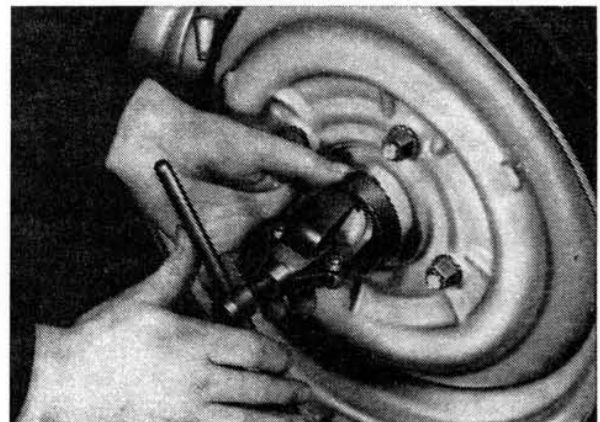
/1 - Removing Hub Cap Using MP 6-124 Drag
